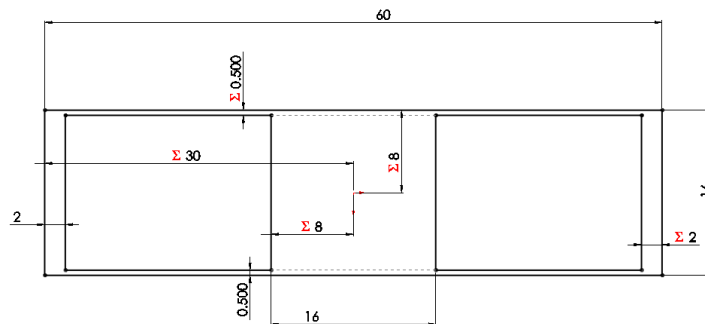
Dimensions of Combined Parallel Guiding Mechanism
